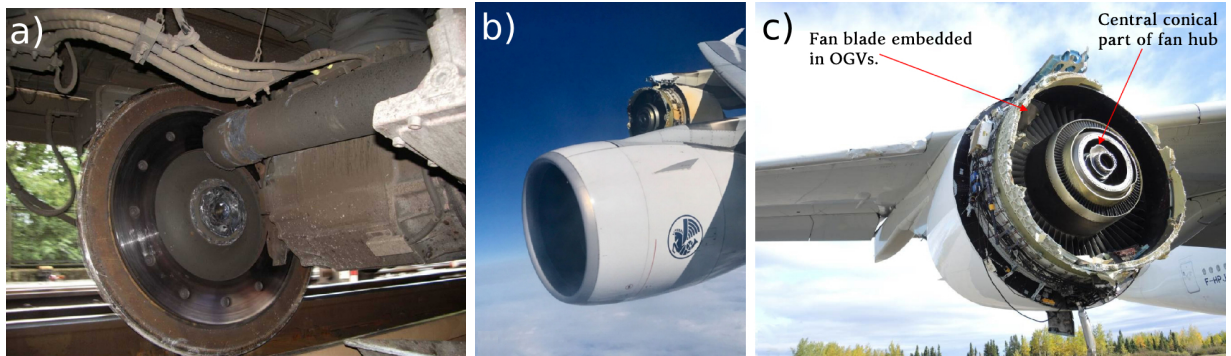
| Examples of component failure due to internal fatigue crack initiation and propagation (a) Fracture of a 34CrNiMo6 steel axle of a German high-speed train. As the initiation location has not been properly identified, this fatigue fracture is supposed to be subsurface initiated because of the presence of numerous non-metallic inclusions in the initiation region [KLI 13]. (b) & (c) Fracture of a Ti64 part from an Airbus A380 motor which occurred during the flight. The analyses concluded on an internal fatigue crack initiation in the Very High Cycle Fatigue regime enhanced by dwell fatigue [BEA 20].
